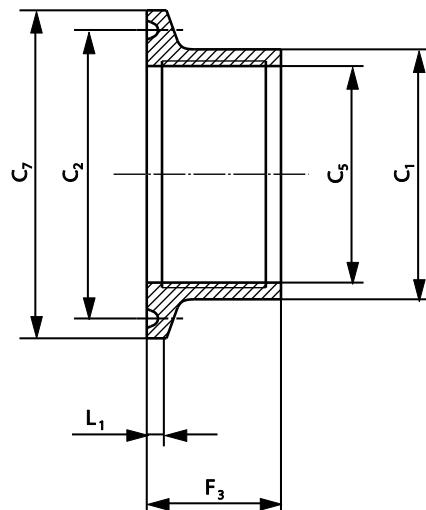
Sectional drawing of a clamp fitting acc. to ISO 2852 - CO
